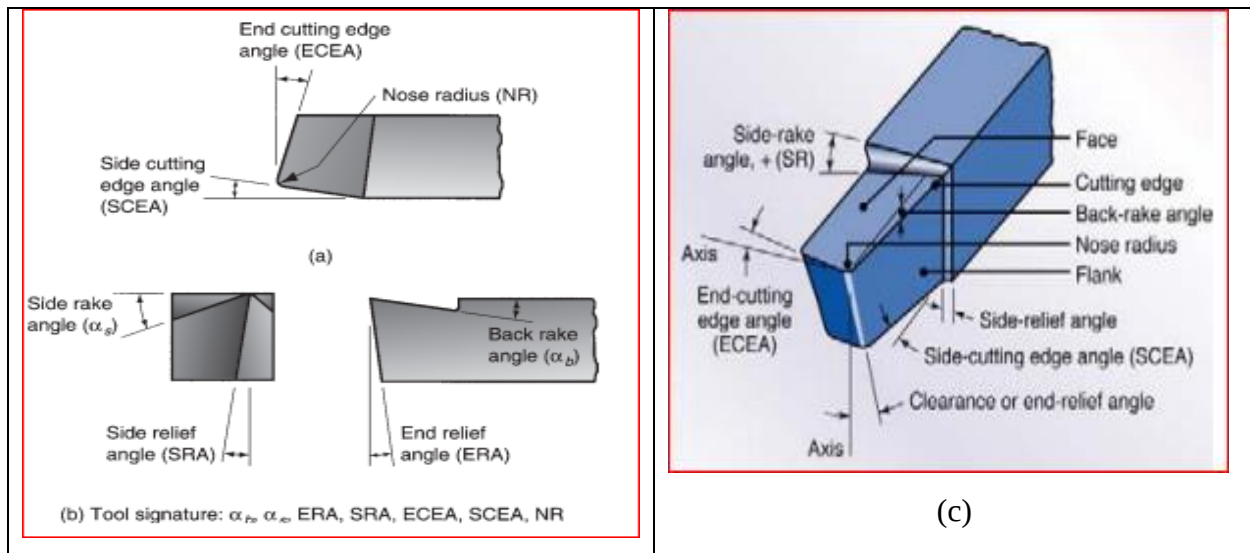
(a) Seven elements of single-point tool geometry 2D, and (b) the tool signature convention defines seven elements (c) elements of single point cutting tool geometry 3D[37].
